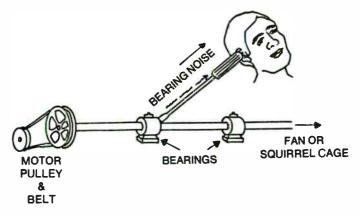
Use a long screwdriver as a stethoscope to detect bad bearings.
